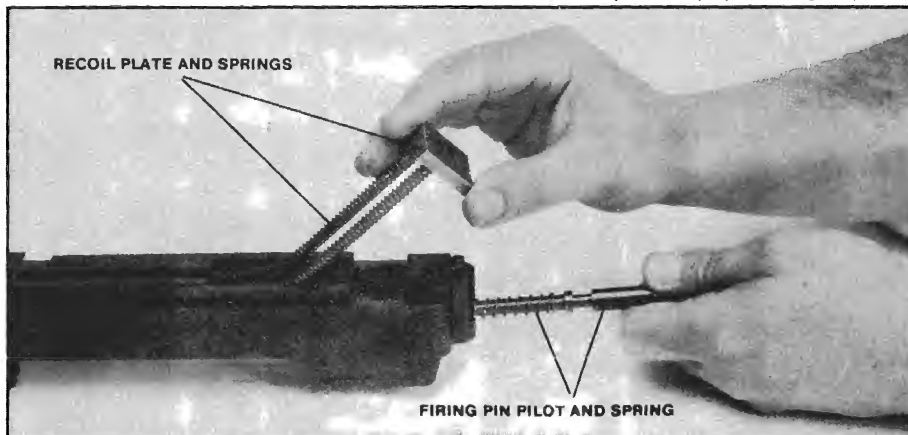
Removing recoil plate and springs, firing pin pilot and spring.
